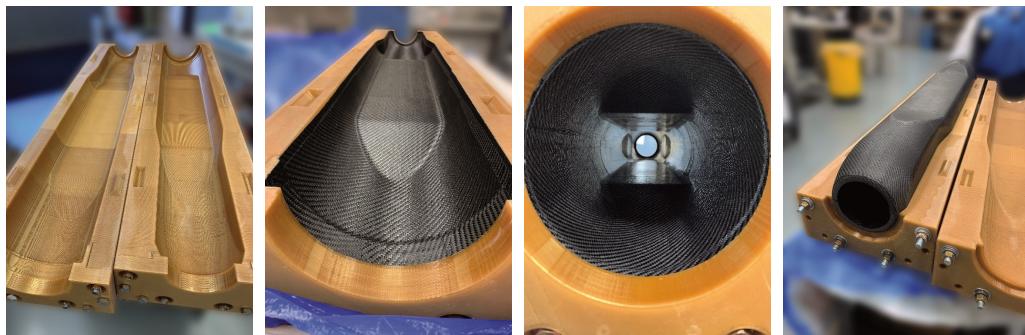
An fused deposition modeling additively manufactured layup mold for composite fabrication using ULTEM 1010. This two-part clamshell mold was used to manufacture a composite fuselage for a drone aircraft prototype. Each mold half had carbon prepreg material applied to it, and when the molds were stacked, the material was joined on the inside to make the continuous barrel.
